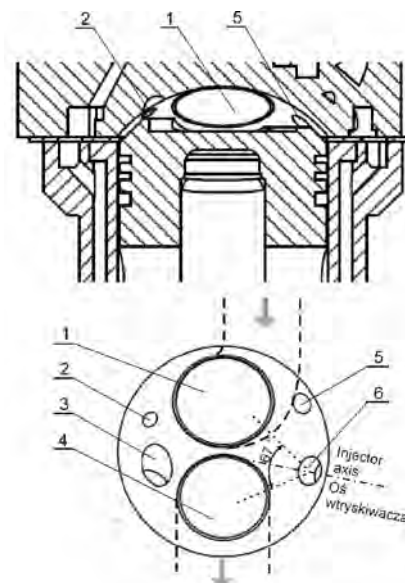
Cross-section and schematic view of SB 3.5 engine combustion chamber: 1 – intake valve, 2 – in-cylinder pressure sensor, 3 – spark plug seat, 4 – exhaust valve, 5 – supplementary sensor seat, 6 – injector seat
